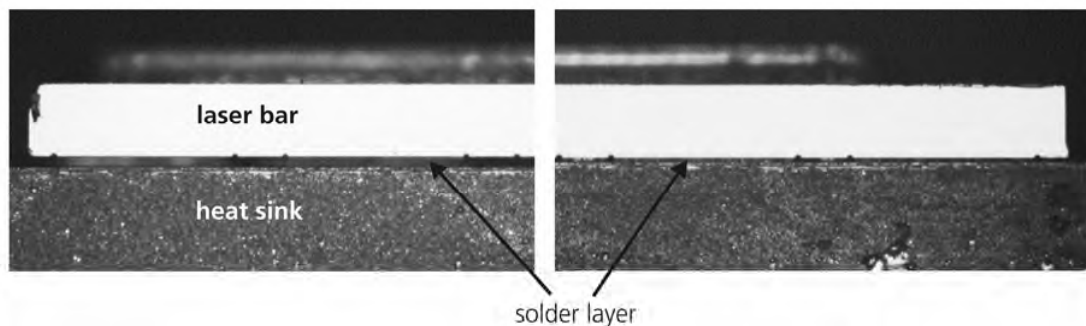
Solder layer on the left and right side of a solder wedge-formed mounted diode laser. The solder layer on the left is about 10 μm and on the right 2 μm thick (front view).
